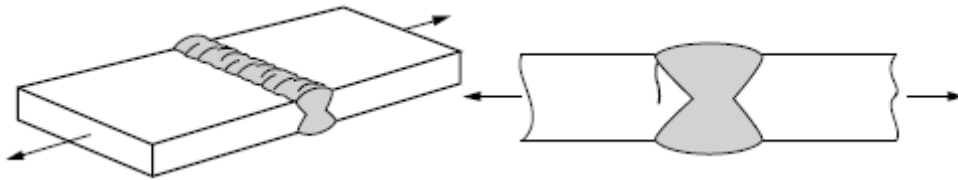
Transverse butt weld; cracking mode indicated on the right (Blondeau, 2001)
